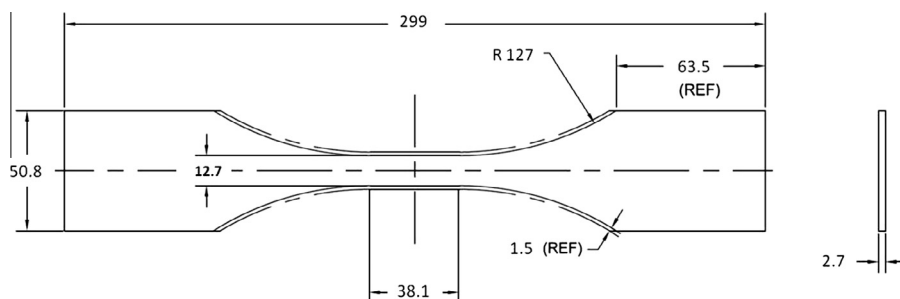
Geometry and dimensions (mm) of tensile fatigue specimens.
